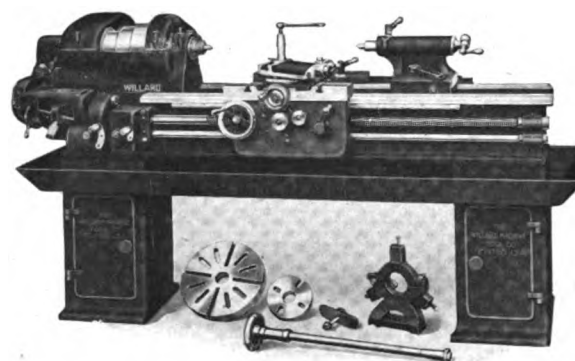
13-Inch Double Back Geared, Quick Change Tool Room Lathe
